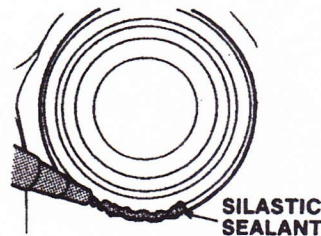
Applying sealer between dust boot ring and caliper housing.
